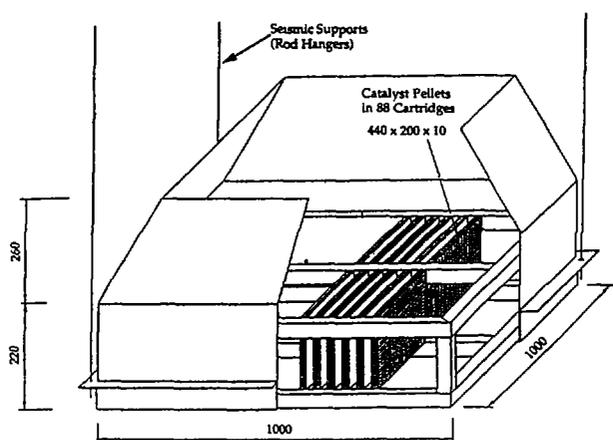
Drawing of the Prototype PAR Device (Dimensions are in cm.)
